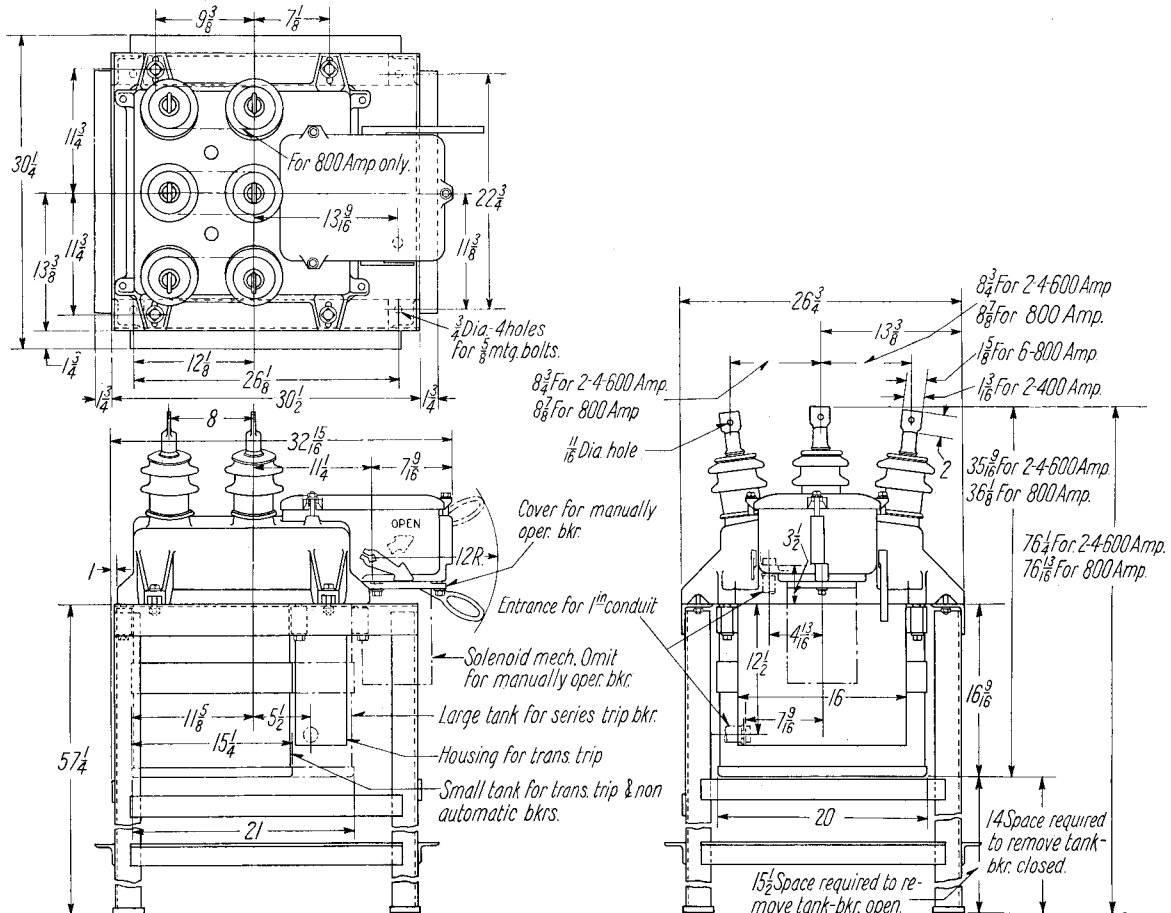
OUTLINE DIMENSIONS OF TYPE FO-22 OIL CIRCUIT-BREAKER
